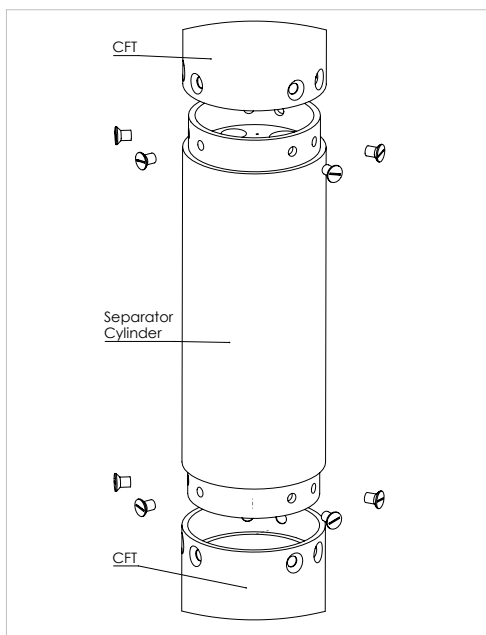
Exploded view of the CFT's fitting to the separator cylinder (inner piping is hidden for clarity).
